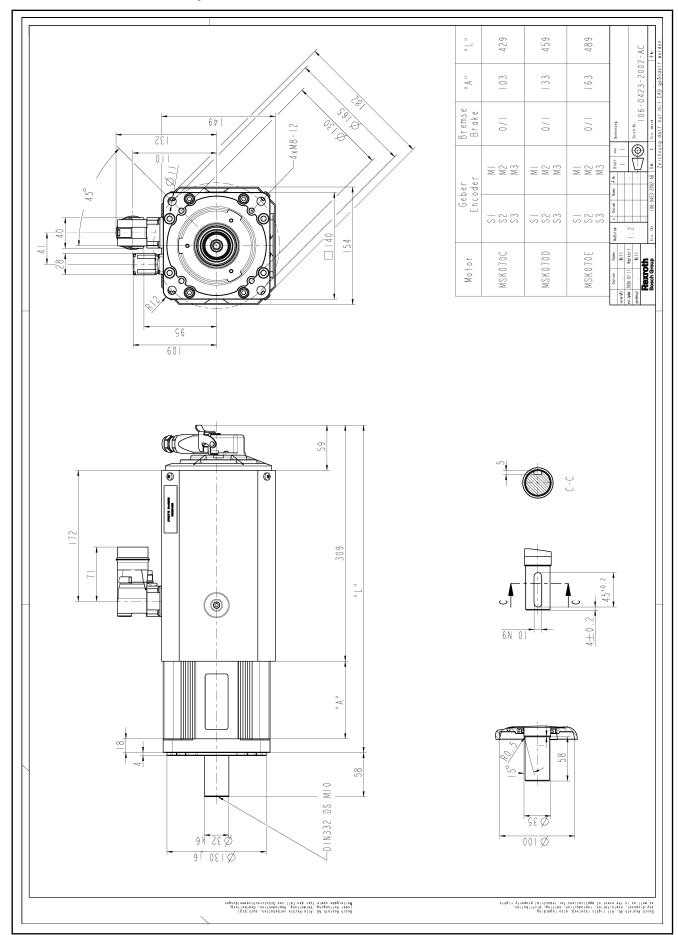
Dimension sheet MSK070 with axial fan unit
